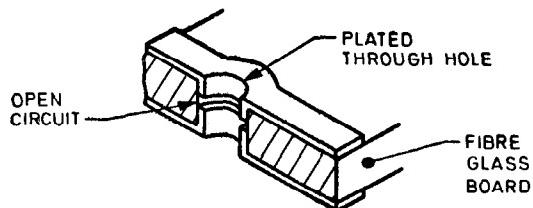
OPEN CIRCUIT PLATED THROUGH HOLE
